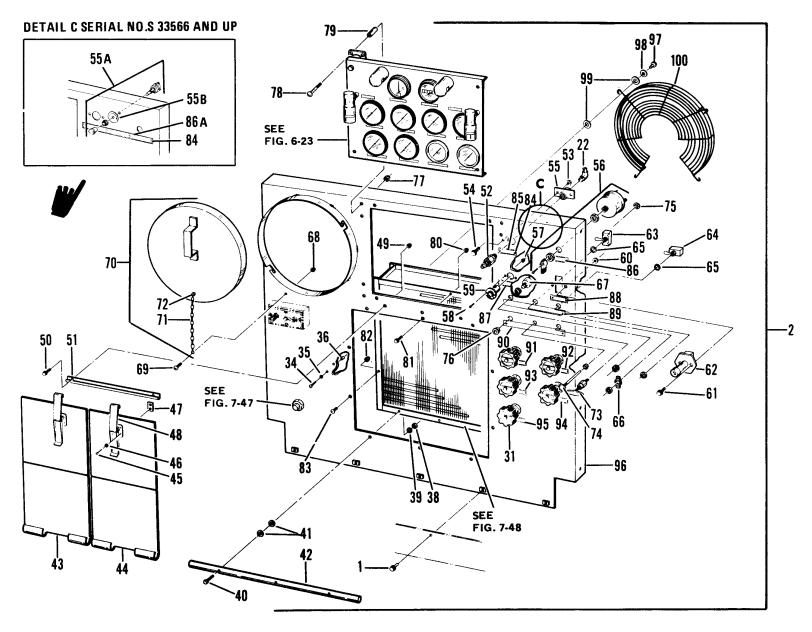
Instrument and control panel assembly (sheet 2 of 2)
